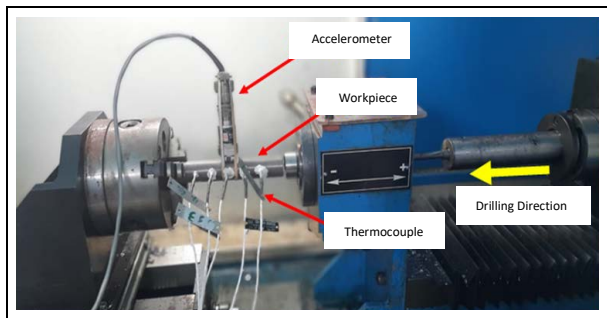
Deep hole drilling apparatus GUNDRILL 1000 CNC
